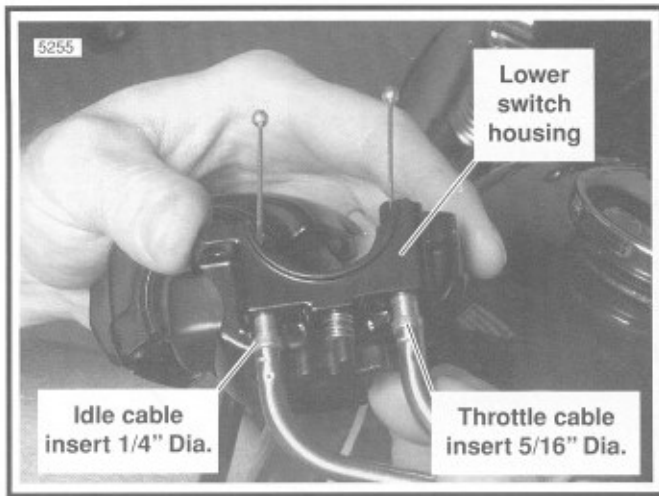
Install Throttle/Idle Control Cables in Lower Switch Housing
